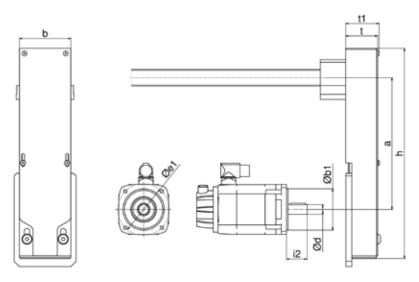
Dimension of standard deflection belt drives for BSTK bearing units
